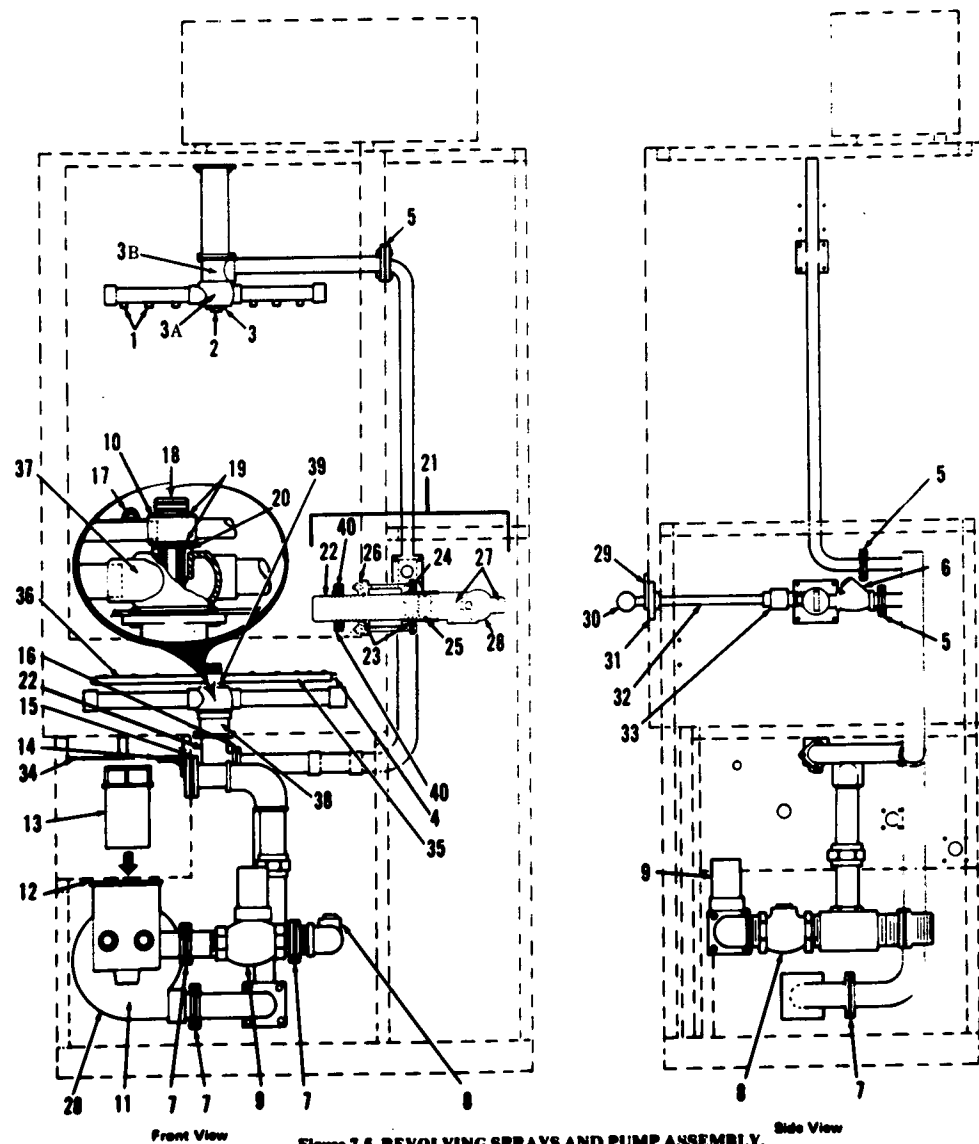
REVOLVING SPRAYS AND PUMP ASSEMBLY.
